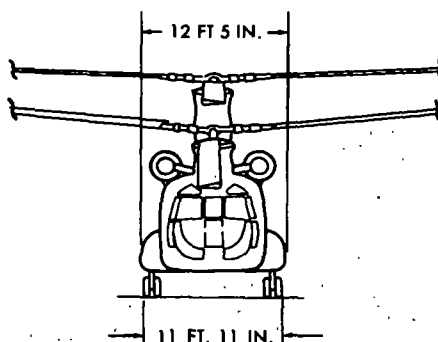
Principal Dimensions, CH-47A (Chinook)
